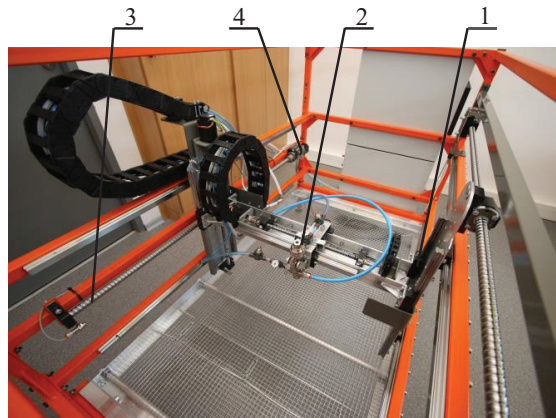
Machine prototype for gluing: 1 – guide, 2 – nozzle, 3 – ball screw drive, 4 – stepper motor.
